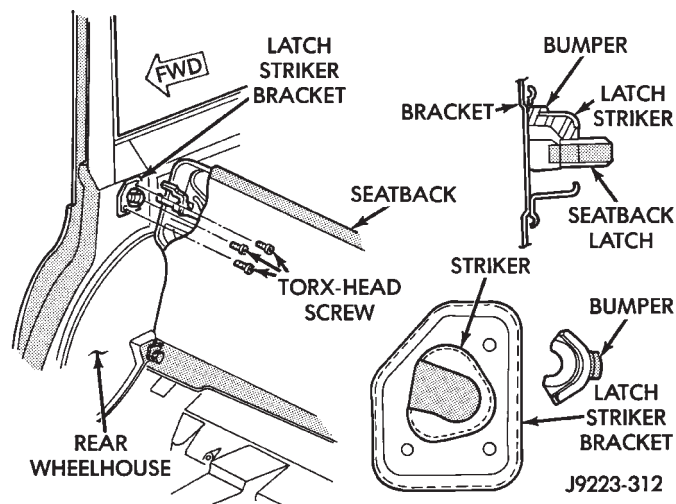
Seatback Latch Striker Bracket Removal/Installation
